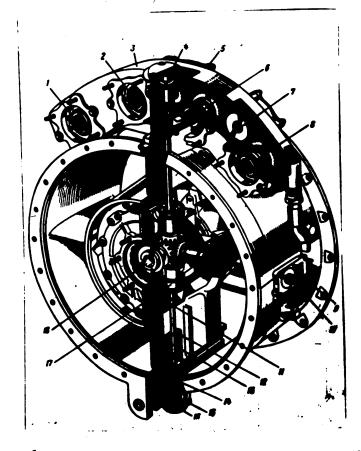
Axial Flow Compressor Accessory Drive Power Take-Off Housing
